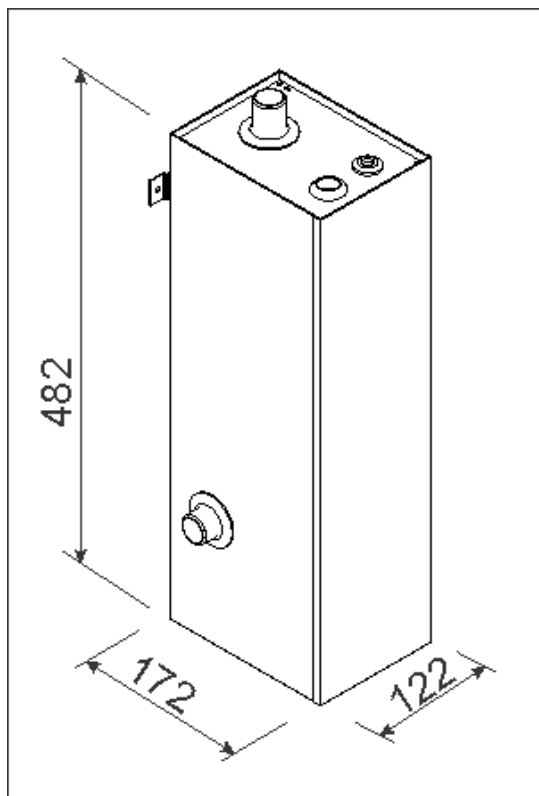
Boiler dimensions TK-eLG 6kW - model IP20 for indoor installation with hydraulic connections on the top and left side.
